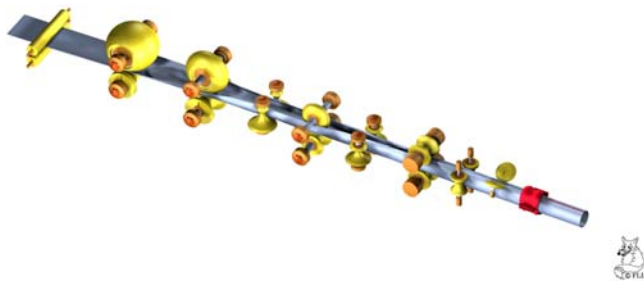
Shaping butt-weld pipe.
